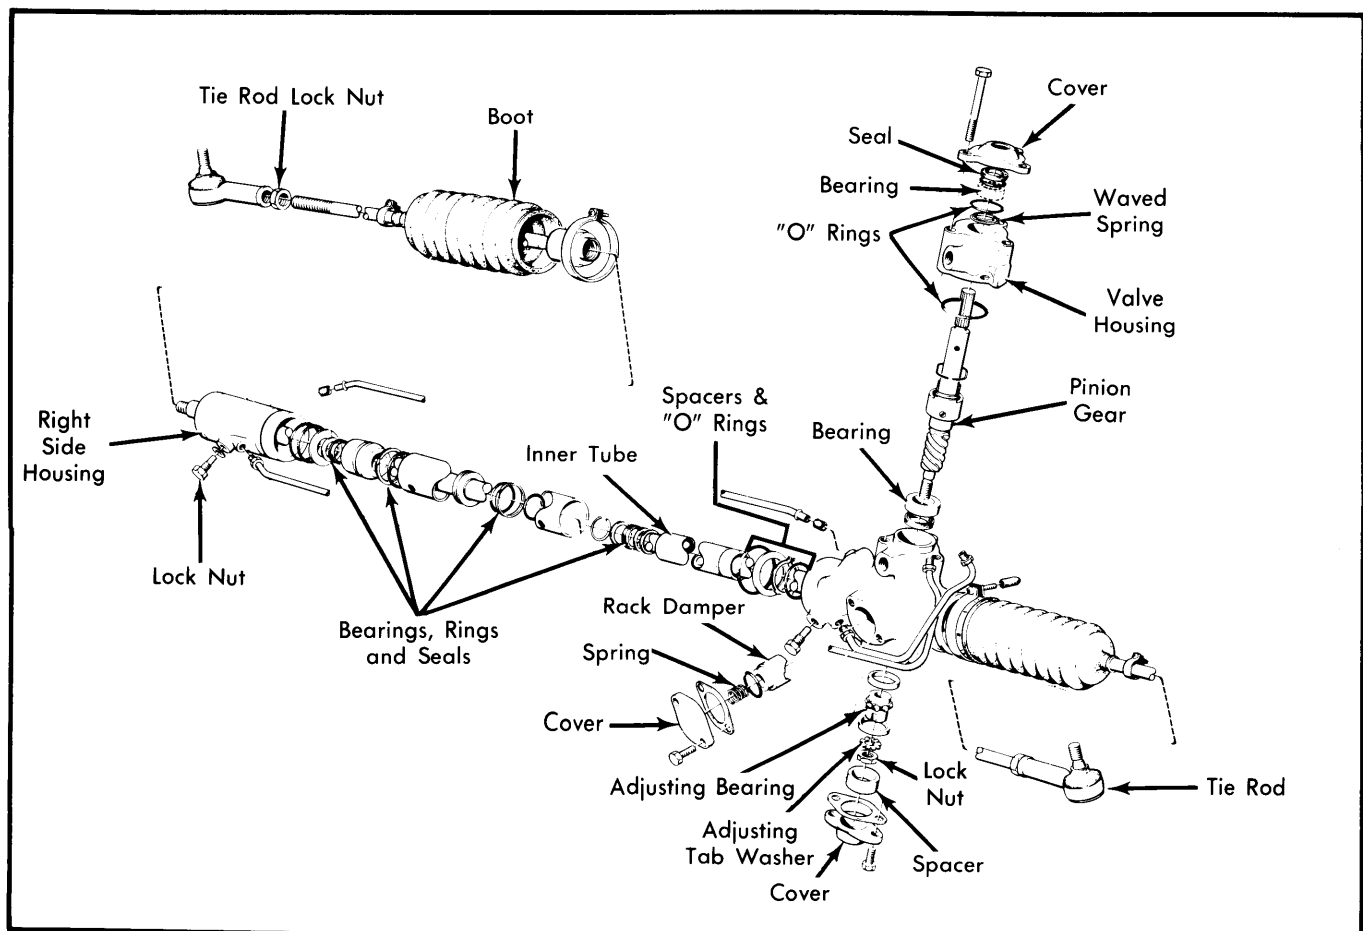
Exploded View of Volvo (Cam Gear Type) Power Steering Assembly
